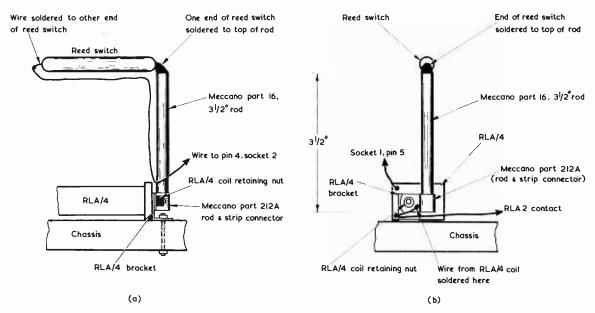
(a). View from rear, showing the method of mounting the reed switch (b). Another view, from the right side, of the reed switch mounting
